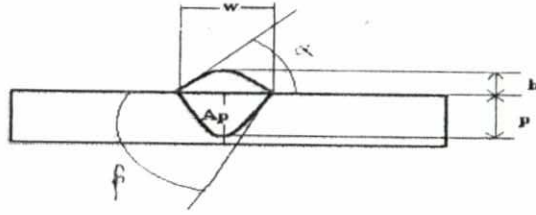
Bead geometry and shape relationship (BG&SR)
